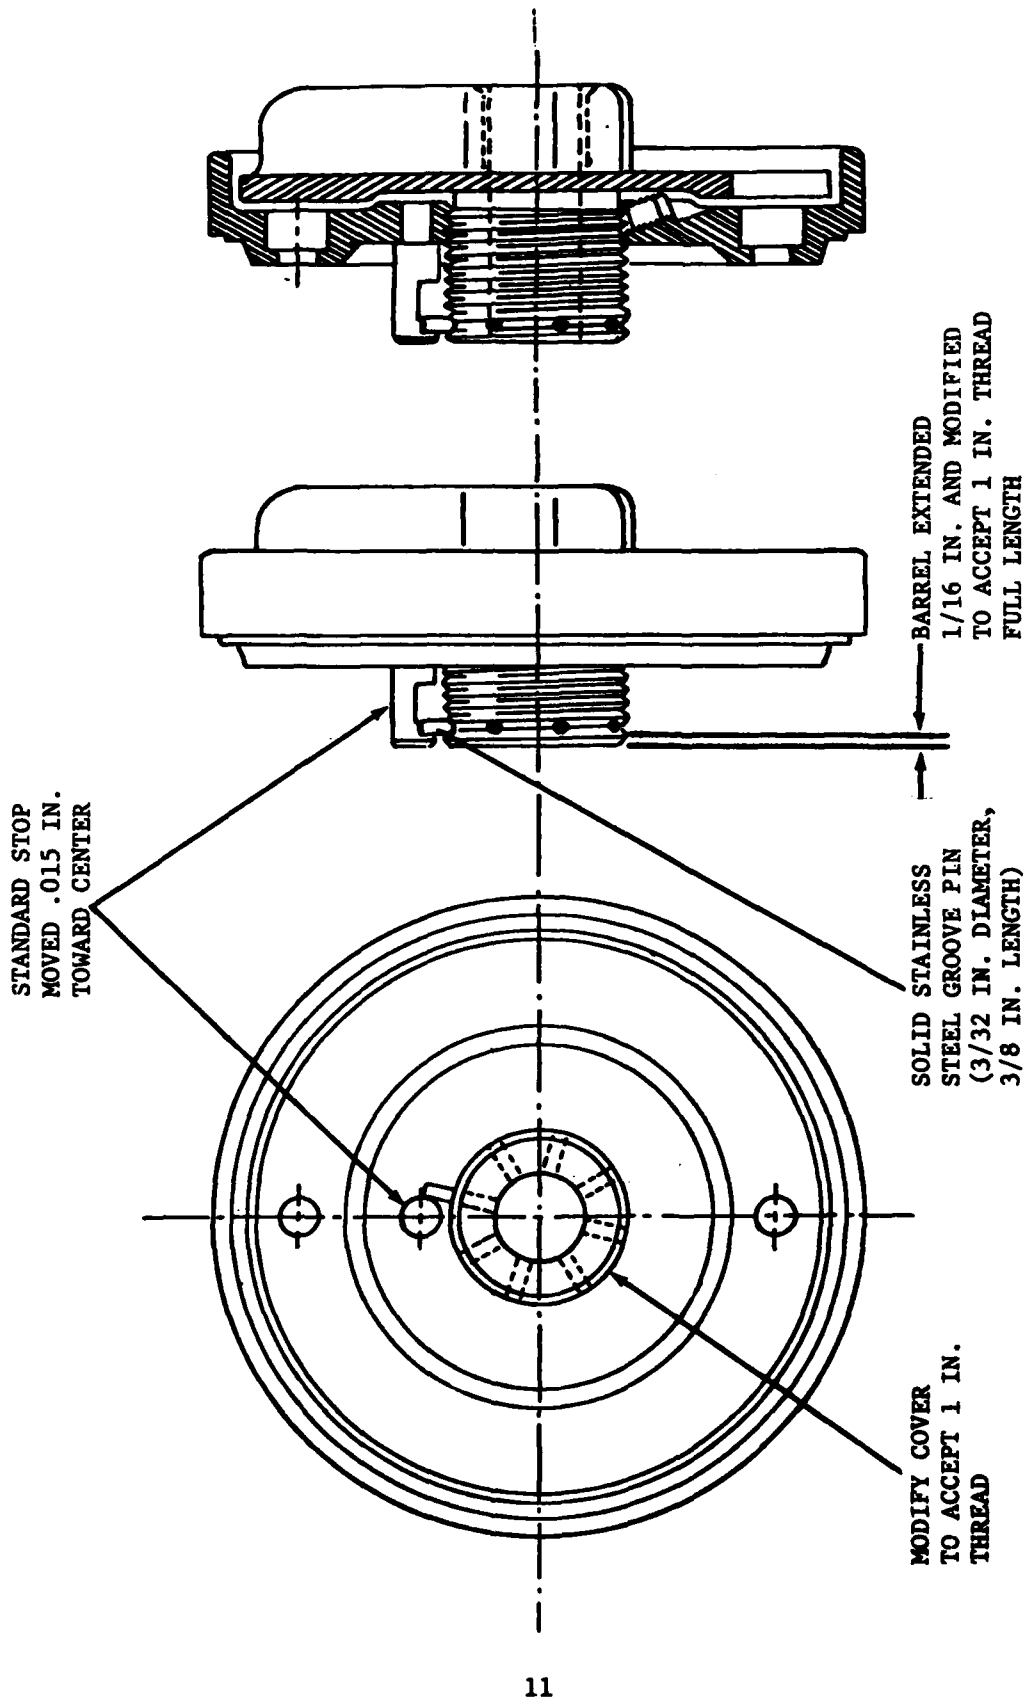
PROPOSED DESIGN CHANGE - MK 12 SSDS HELMET ADJUSTABLE EXHAUST VALVE ASSEMBLY
